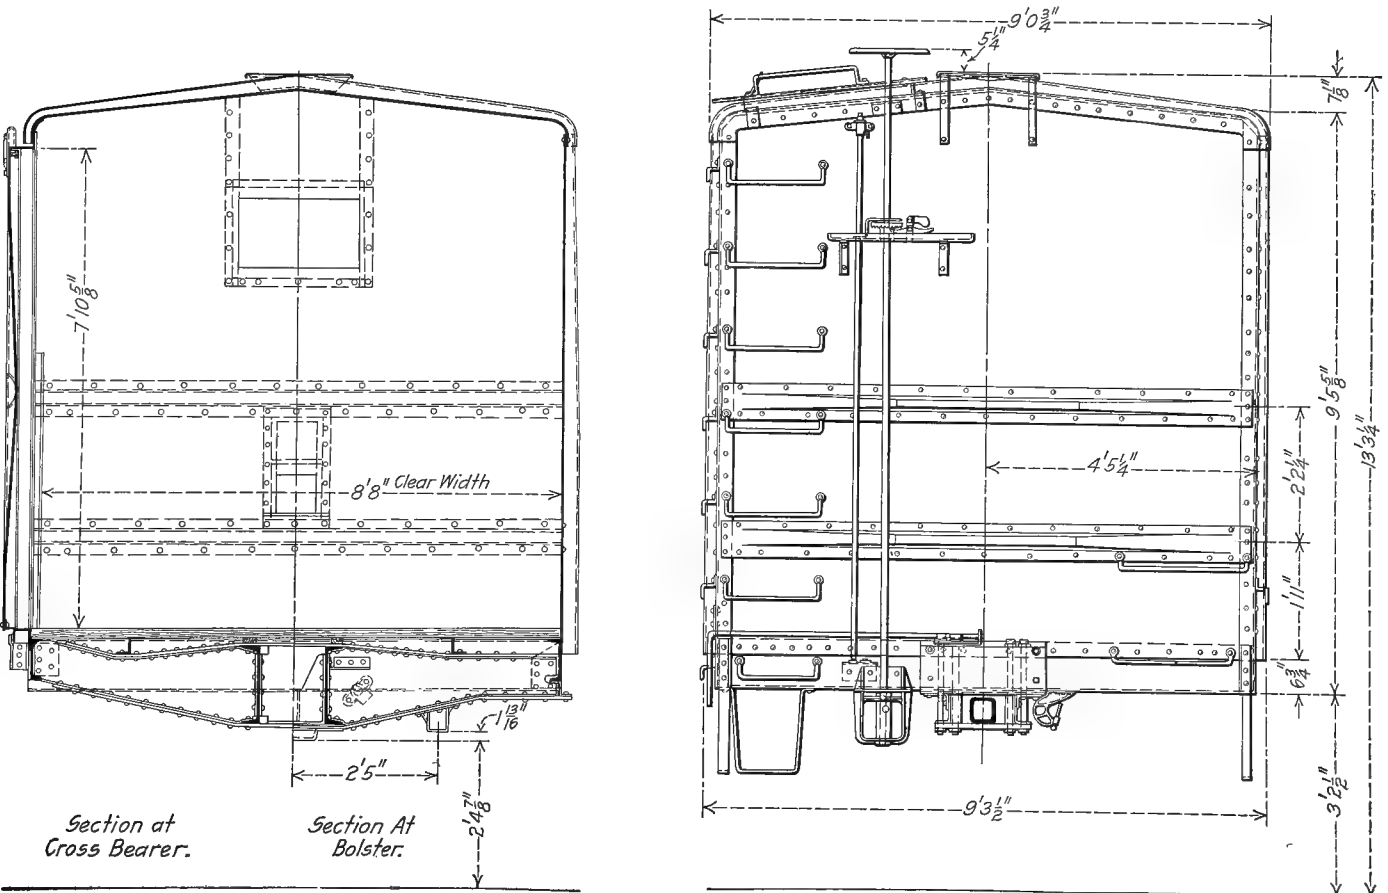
End Elevation and Cross Sections of Canadian Pacific Steel Box Car Shown in Figs. 2 and 270.
